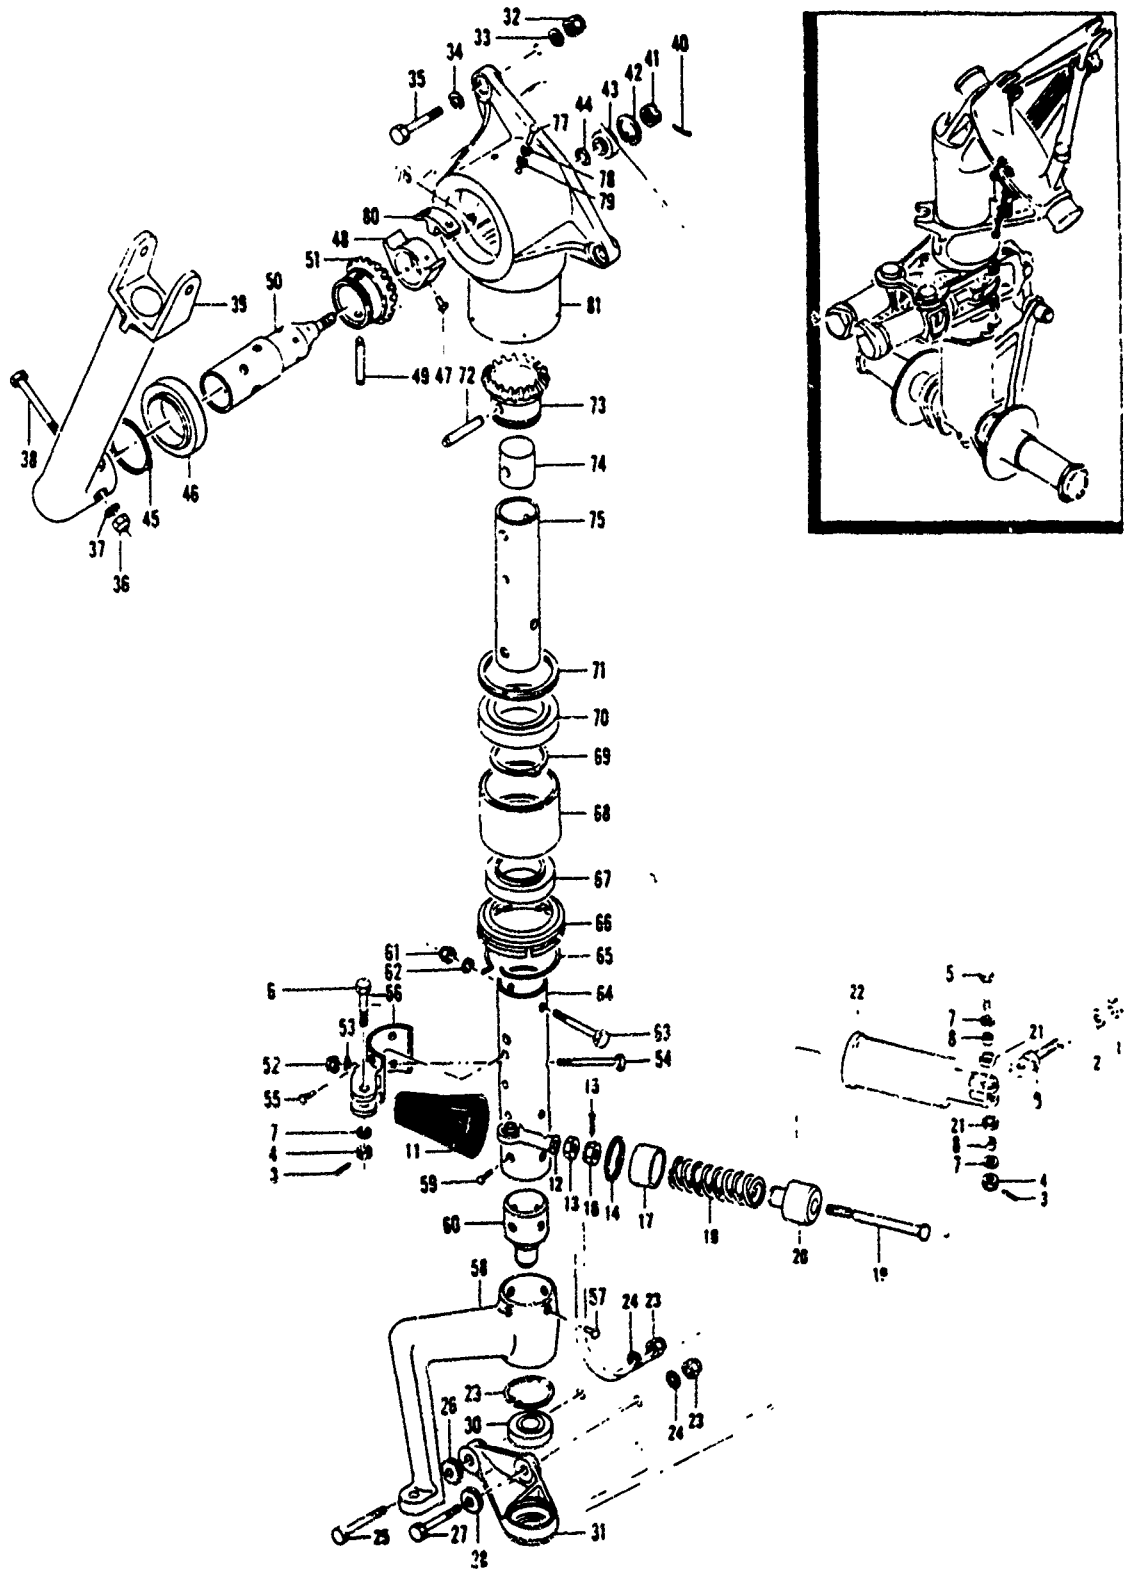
Landing Gear Steering Jackshaft Installation (Sheet 1 of 2)
